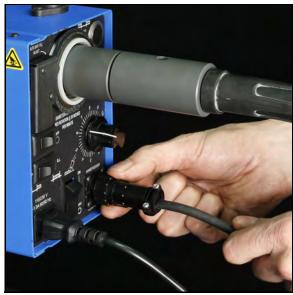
WIRE FEED CONTROL CABLE CONNECTED
